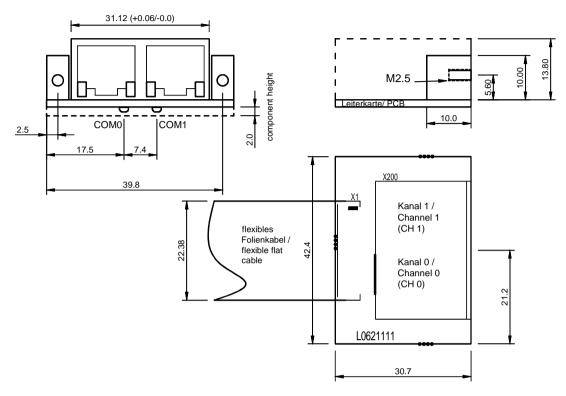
Dimensioning Ethernet Assembly Interface (AIFX-RE)
